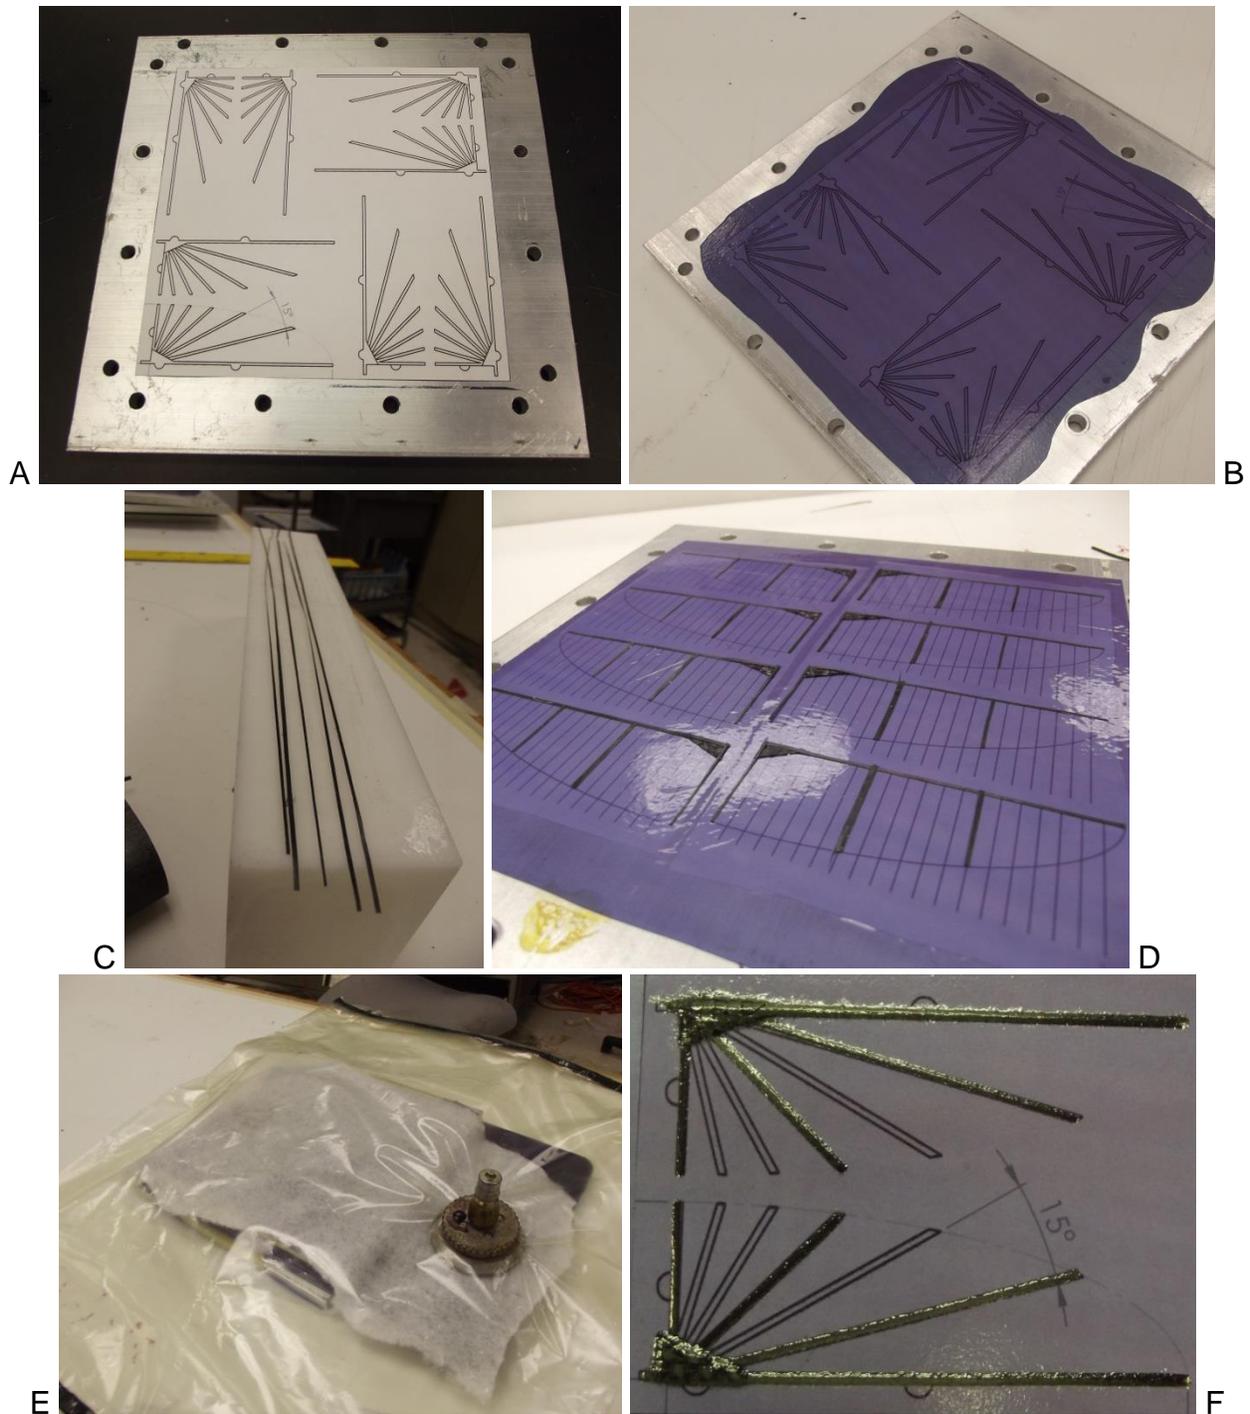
A look at the flat plate and hand lay-up procedure. A) A flat plate with Design 2 printed on paper and glued to the surface. B) The pattern with release film on top. C) Hand-cut prepreg carbon/epoxy strips. D) Parallel batten wings laid-up before curing cycle. E) Flat plate placed into a vacuum bag. F) Radial batten wings post cure before they are removed from the flat plate. Photos courtesy of Jason Rue.
